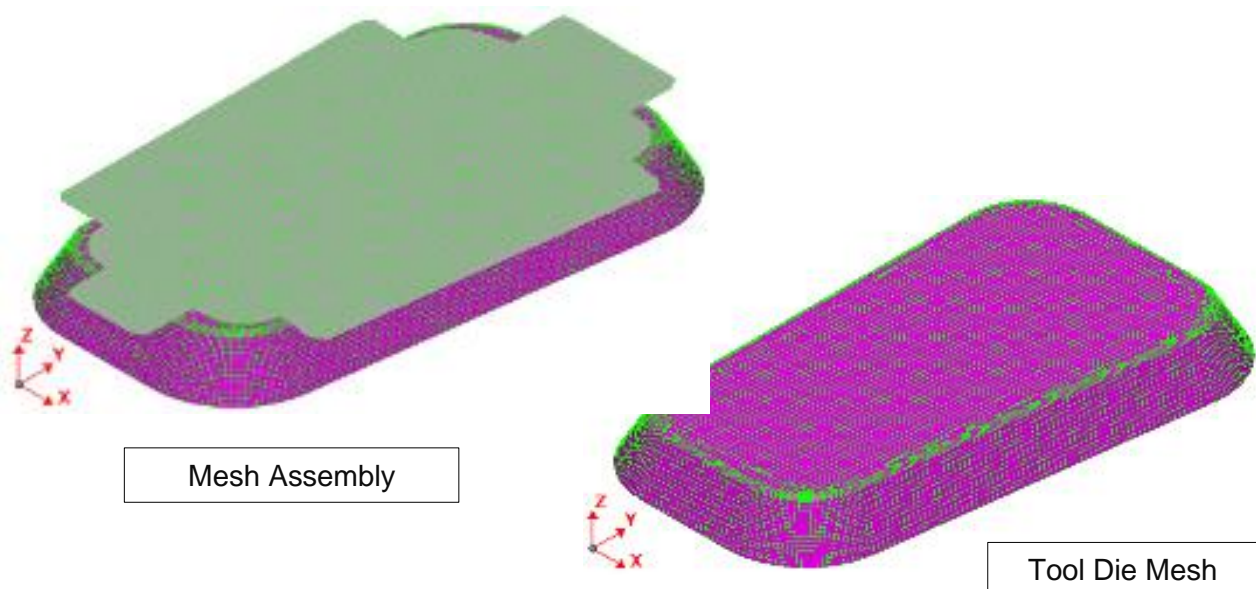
Concept-8 first stage tool and assembly FEM in PAM-STAMP 2G
